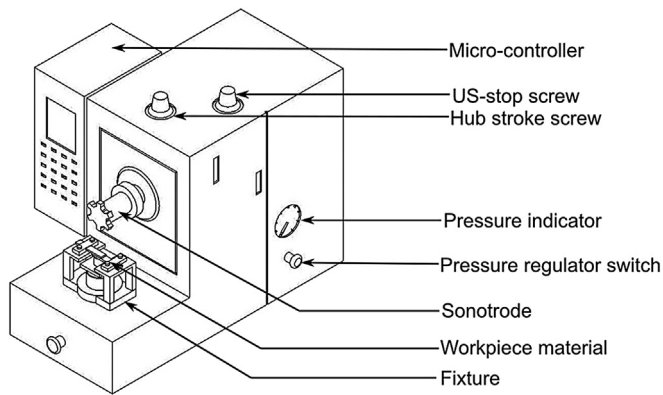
Schematic diagram of lateral drive ultrasonic welding system.
